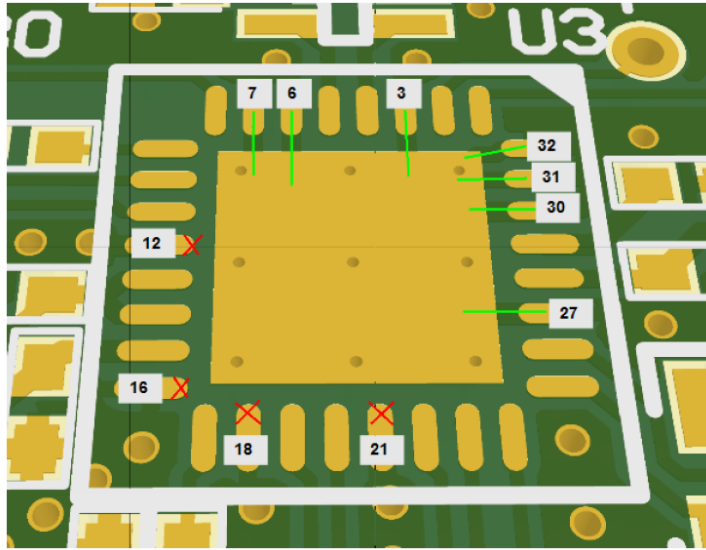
Atmel AT86RF233 Ground Connection Layout Recommendation [60]
